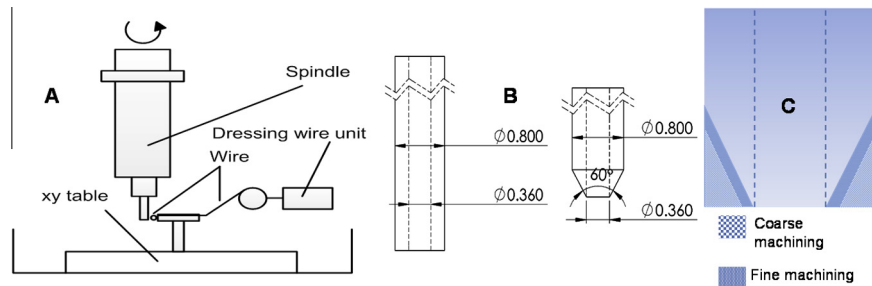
Formation of punches in WC by μ -WEDG: (A) schematic of μ -WEDG machining, (B) geometry of electrode before and after μ -WEDG process, (C) coarse and fine electrode machining.
